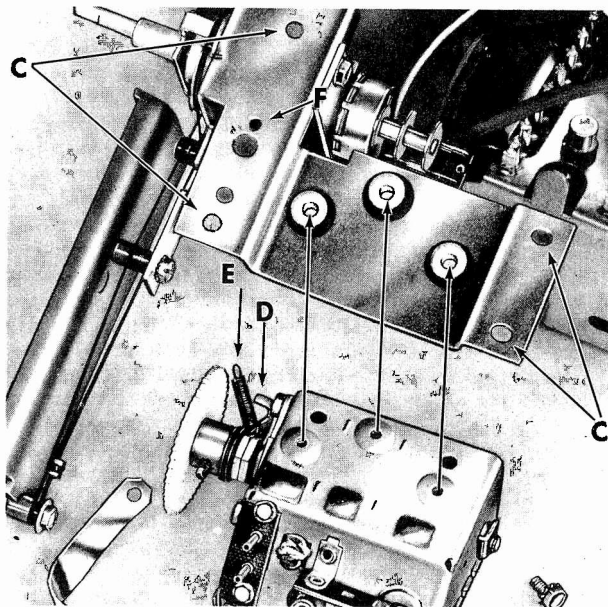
View Of UHF Tuner Shown Removed From Chassis.
